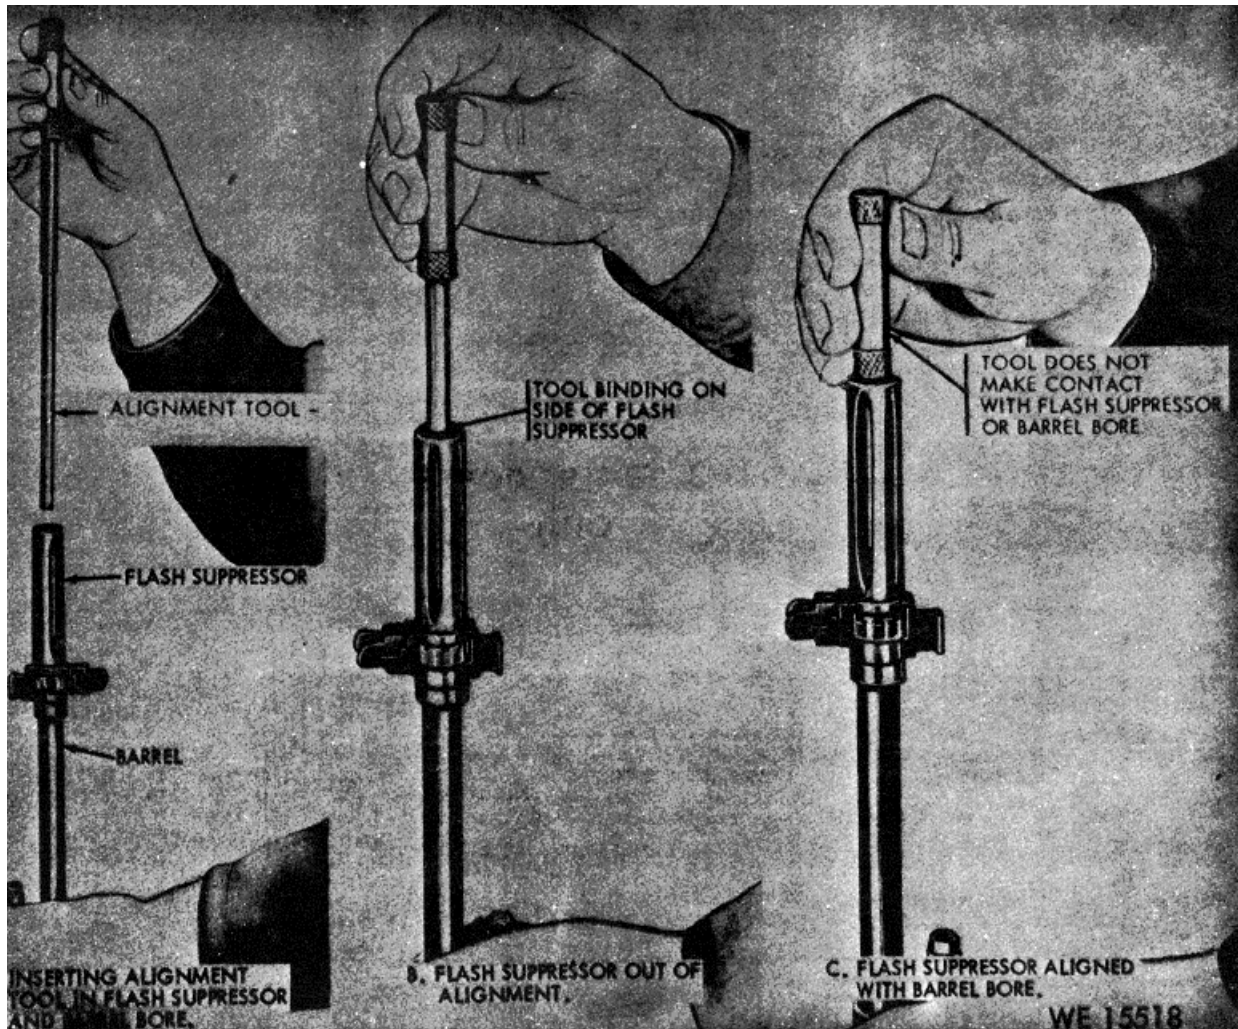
Checking alignment of flash suppresser with alignment tool.
